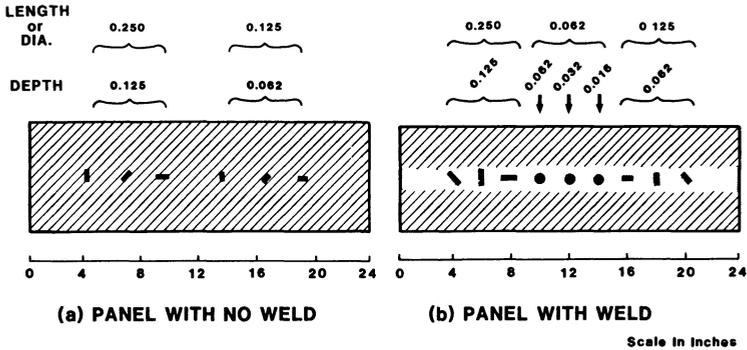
Flaw sizes and orientations in non-welded and welded panels.
